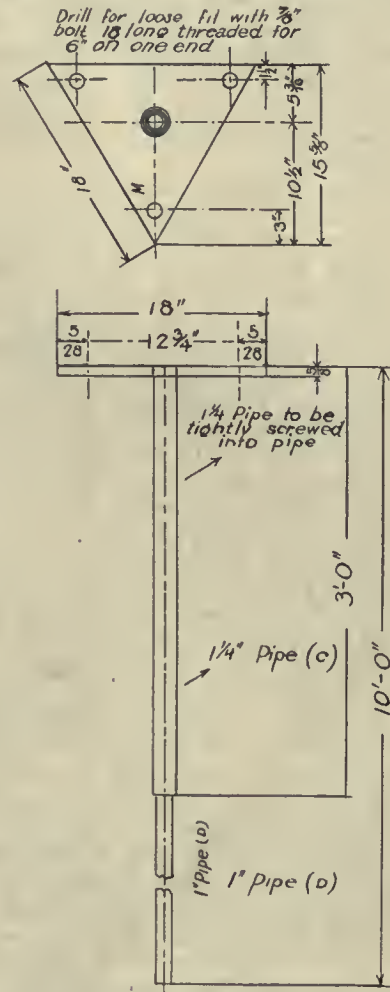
DETAILS OF CONSTRUCTION OF STATION.
